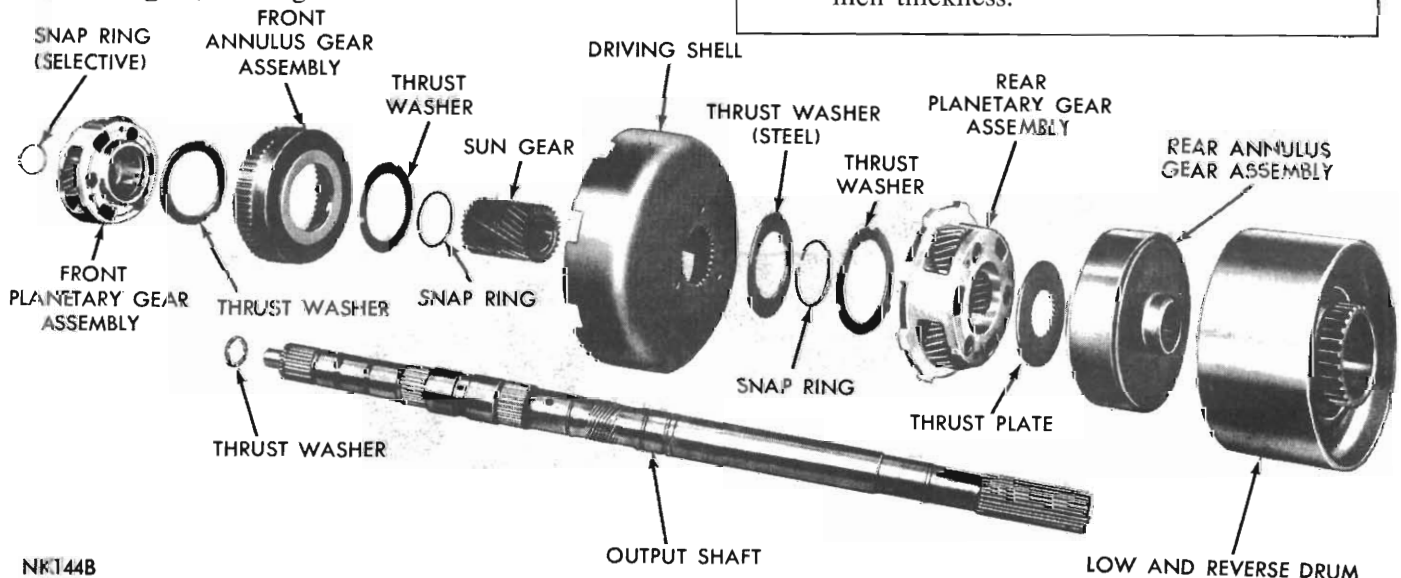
Planetary gear train and output shaft disassembled (A-727)
